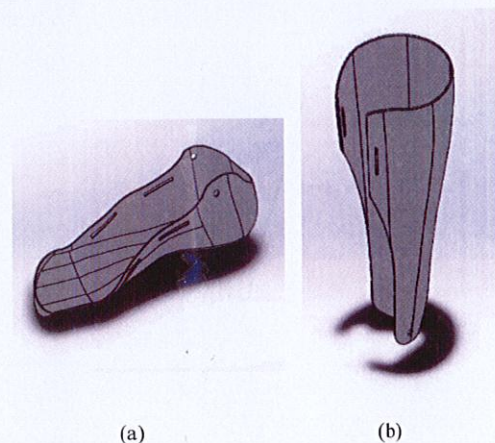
Final Design of (a) Foot Part and (b) Shank Part
